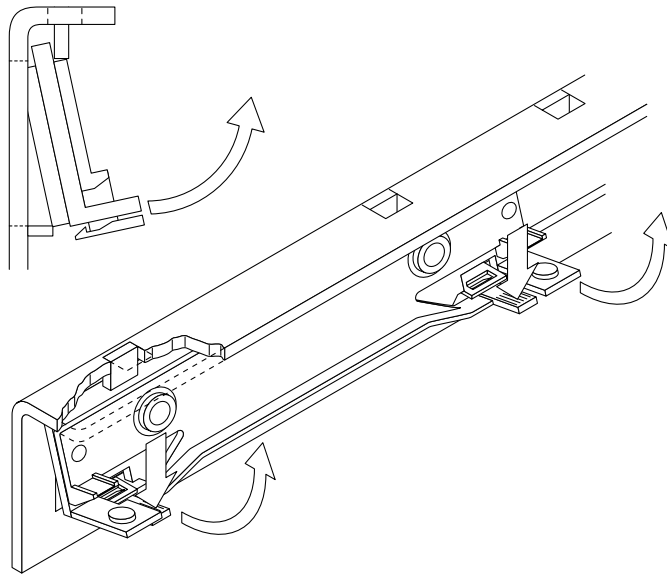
Removing the SPARCstation 10 Rear Panel Filler Plates
